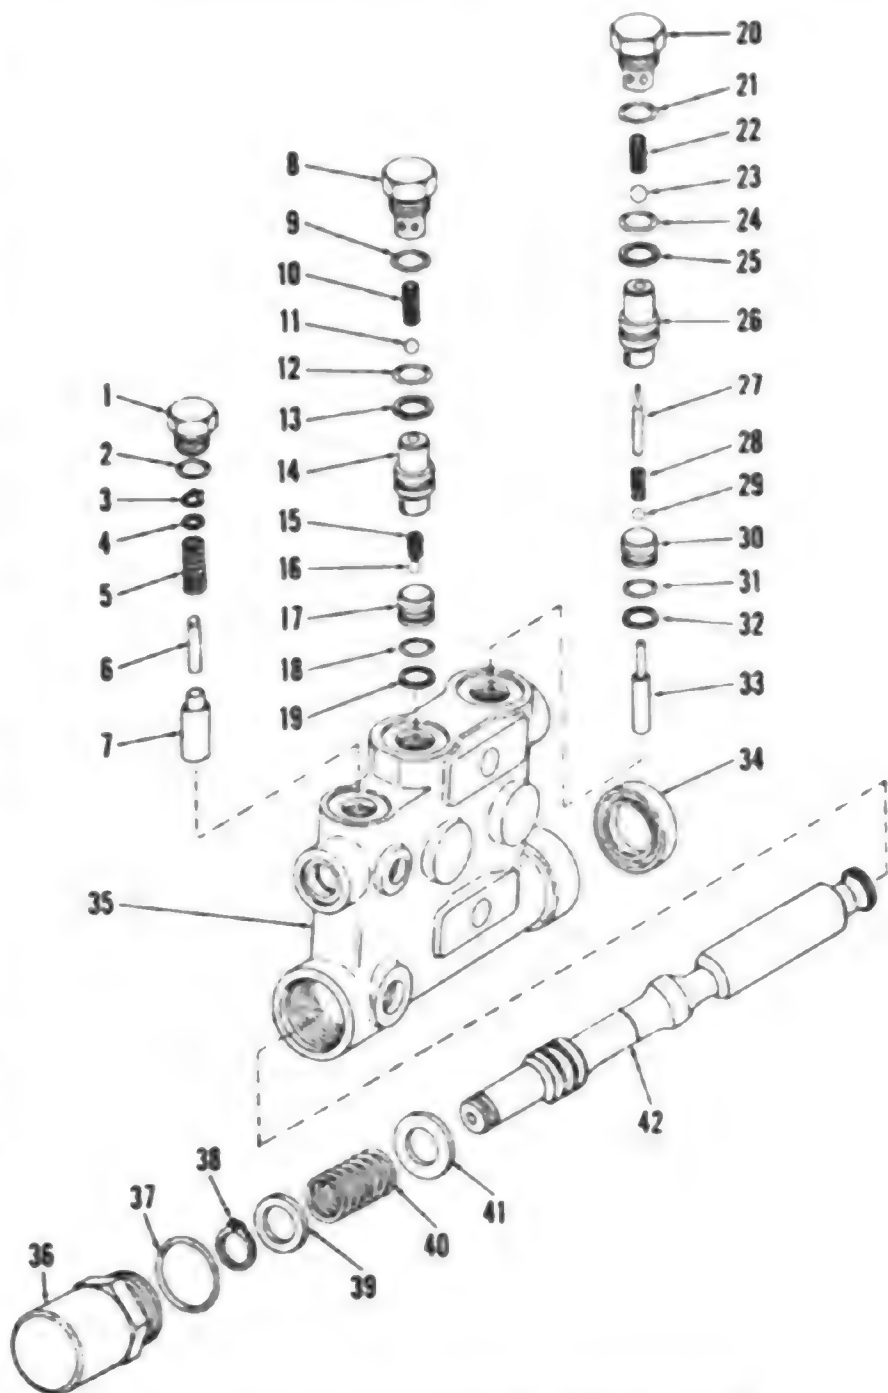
Exploded view of hydrostatic drive control valve assembly.
